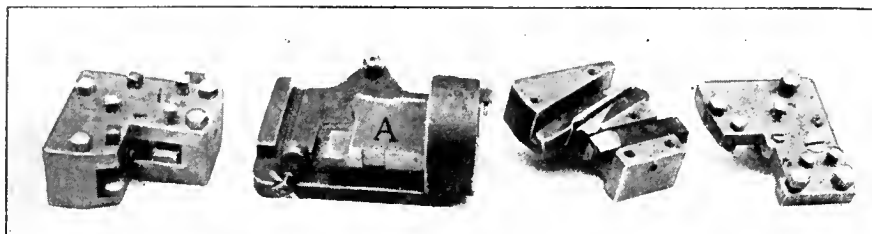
UNIT TOOL BLOCK, ASSEMBLING JIG, AND COMPONENT PARTS.
